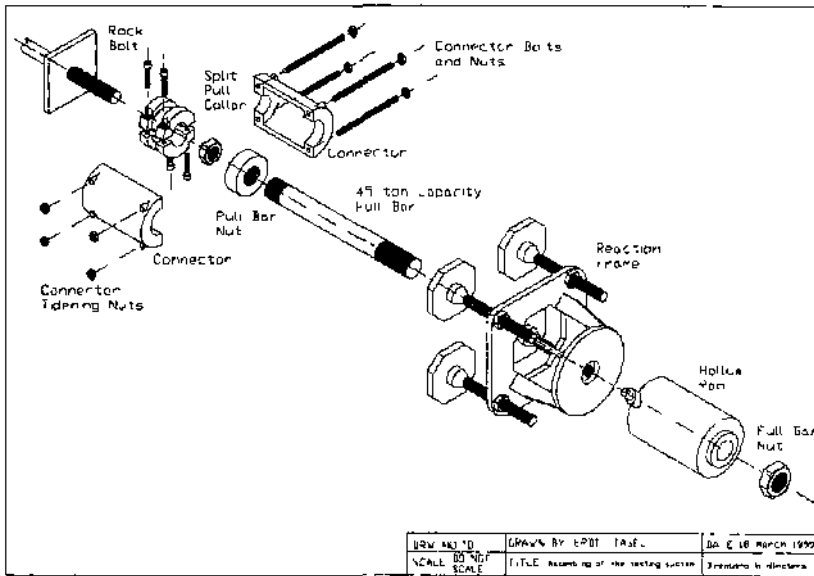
Assembly of the mechanical part of the pull-out test system with hollow ram
